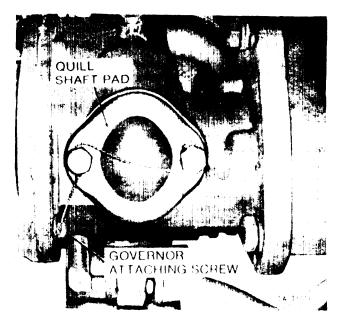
Securing quill shaft cover screws and bottom governor attaching screw.
